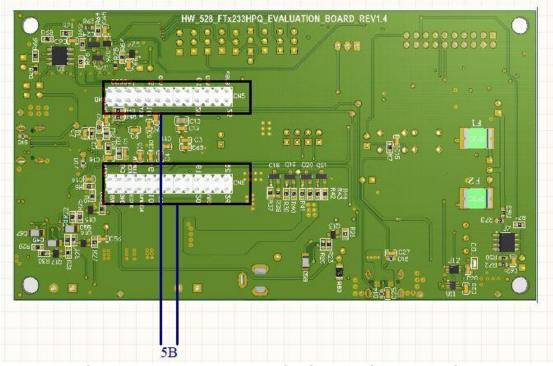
UMFT4233HPEV Evaluation Board - Bottom View
